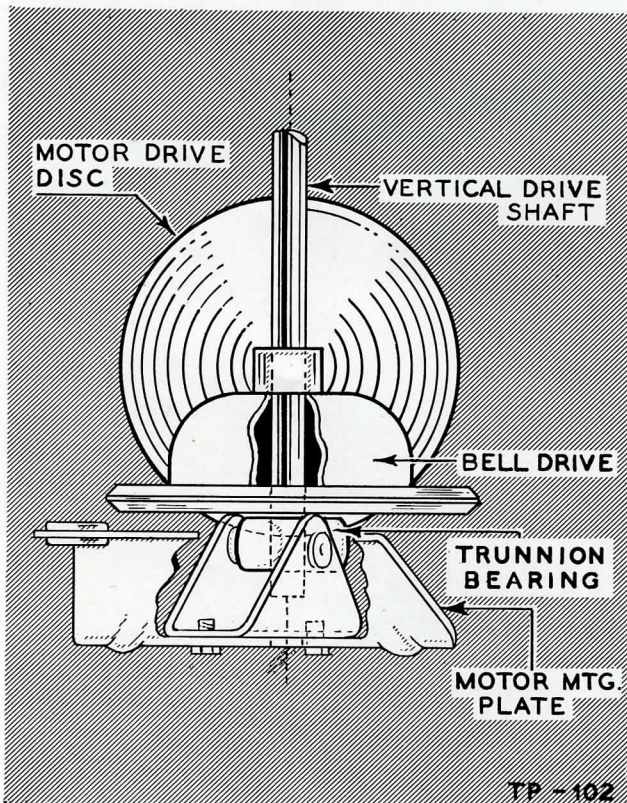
CORRECT POSITION OF BELL-DRIVE SHAFT—END VIEW
